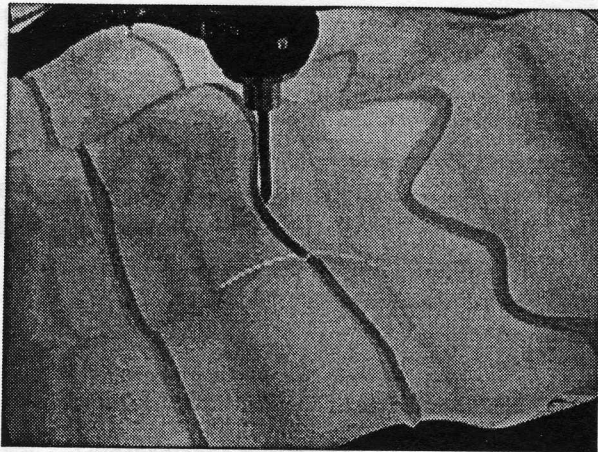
The accuracy fixture with the robot following a simulated weld seam.
